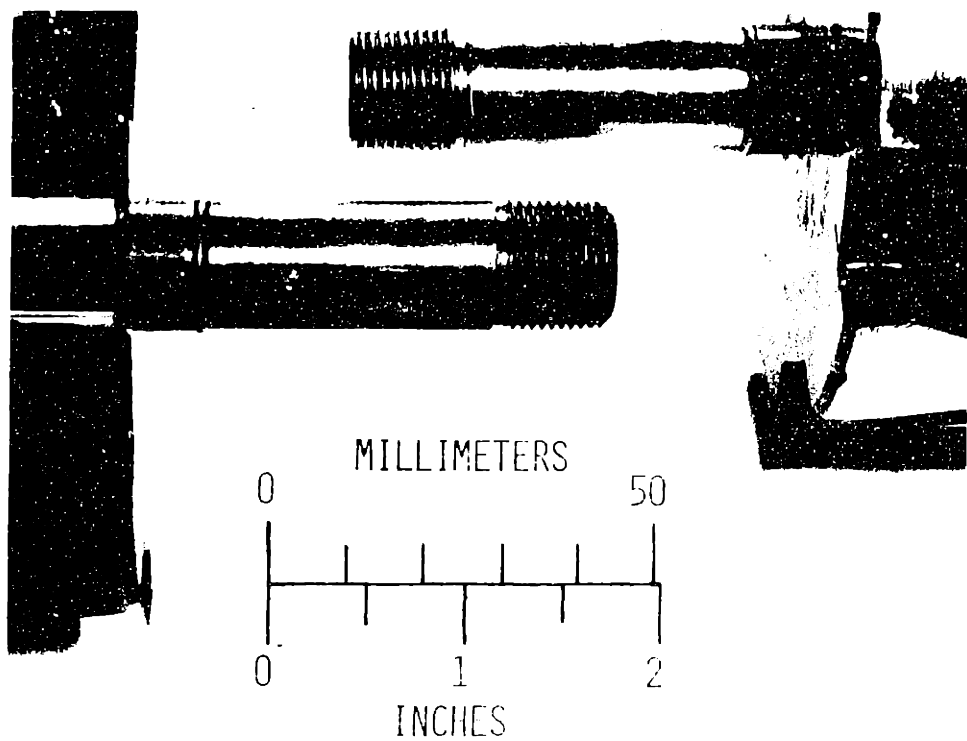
Modification to the alternator rotor. Note the chamfer to the right of the threads on the top rotor. Bottom rotor is not modified.
